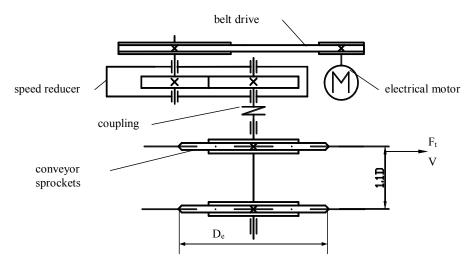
Fig A. Design a belt conveyor mechanical drive. If turning force Ft, peripheral speed V at well as diameter of sprockets D are given (Table A).
